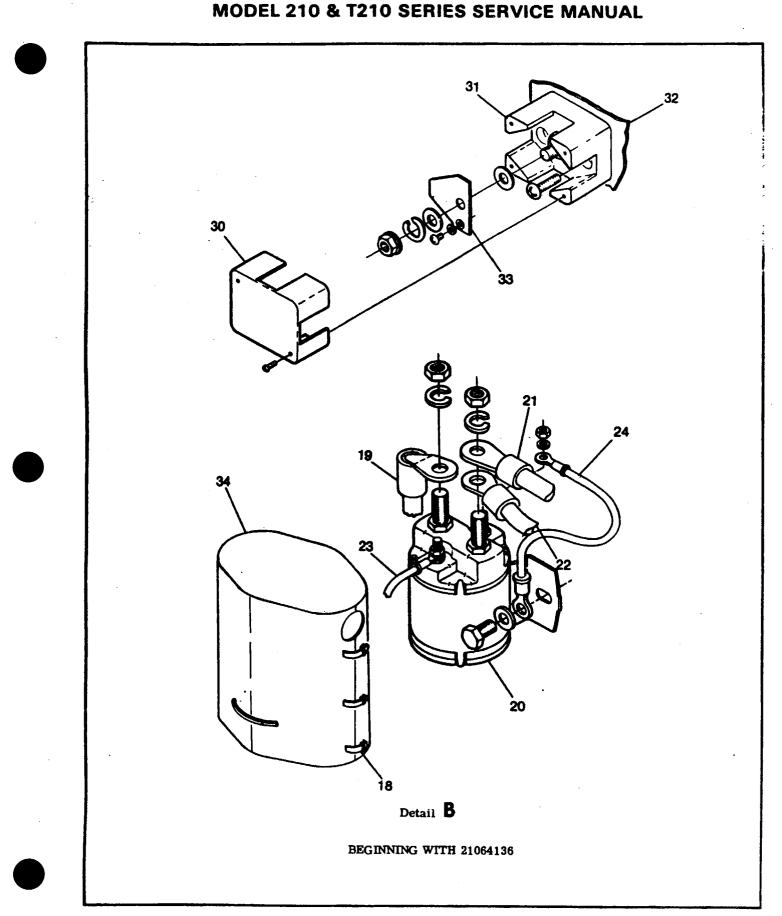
Battery and Electrical Equipment Installation (Sheet 5 of 5)
